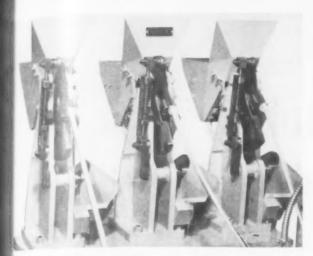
In the reciprocating leaf arrangement shown above the leaf rises by straight line or rotation, and in so doing will pick up some parts which are in position. Adapted to large, heavy parts.
